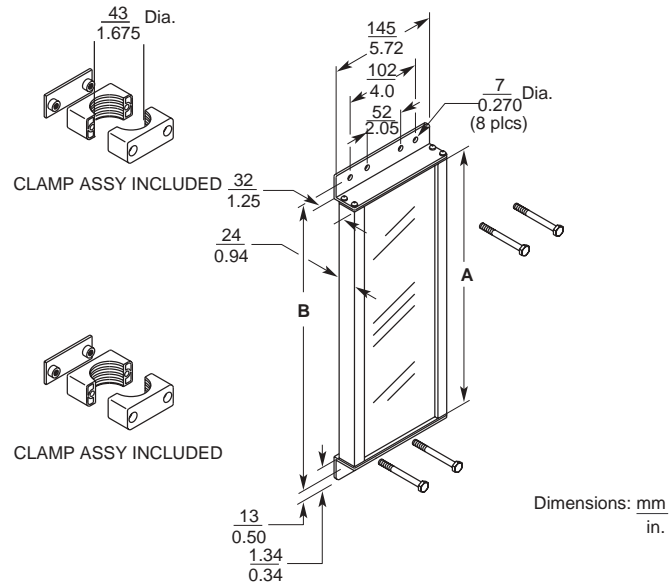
Mirror Dimensions (See Table 28 for Dimensions A and B)
